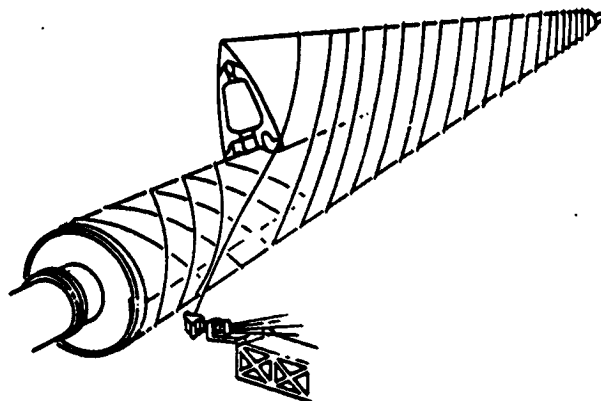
FILAMENT WINDING OF THE TRAILING EDGE TAKES PLACE RIGHT OVER THE SPAR/SHELL MANDREL ASSEMBLY
